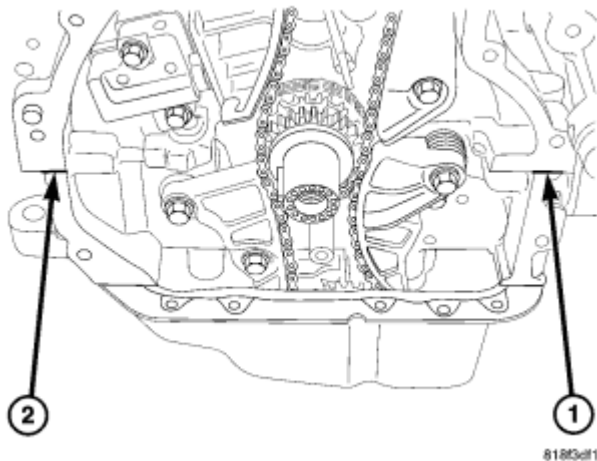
FRONT COVER UPPER T-JOINTS
